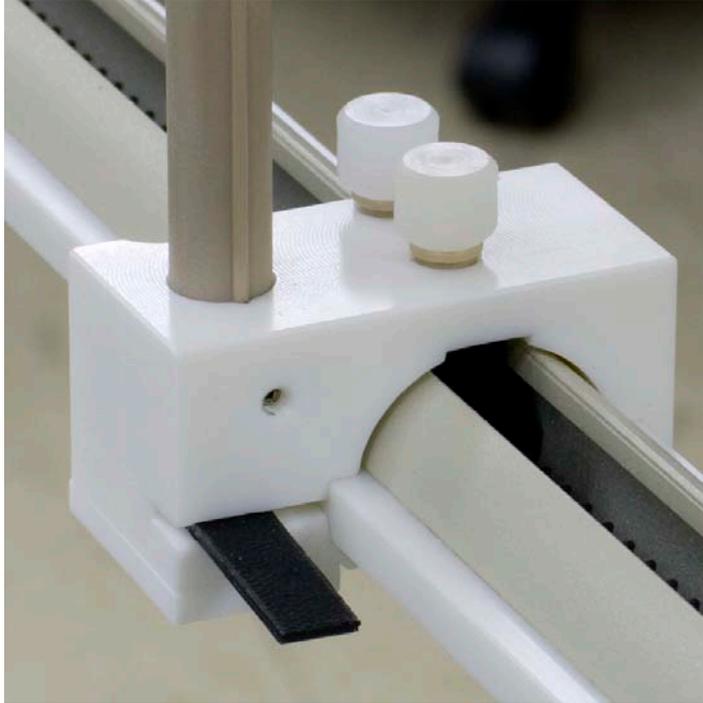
Z-Drive Assembly with Y-Axis Block Home Position Flag.
